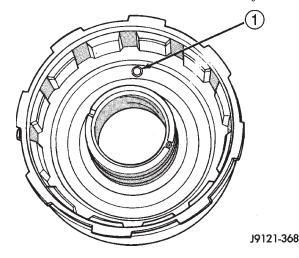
Front Clutch Piston Retainer Check Ball Location
